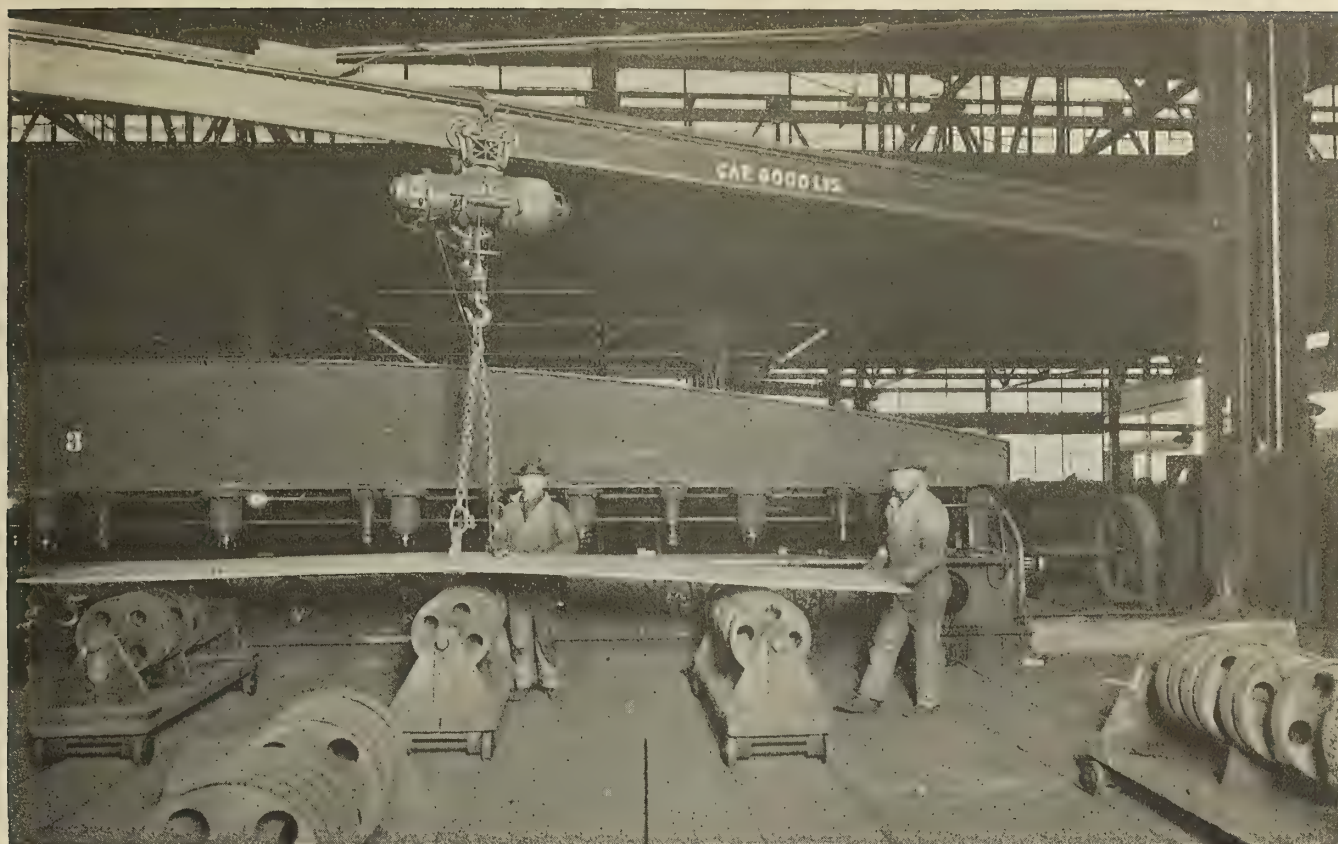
Shepard 3-Ton Electric Hoist Operating on Jib Crane Used for Transferring Plates from Roller Skids to Plate Planer
